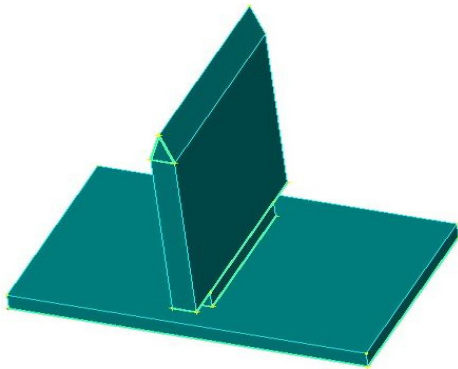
Load cell sliding supported part 3D-CAD of simply supported beam type structure
